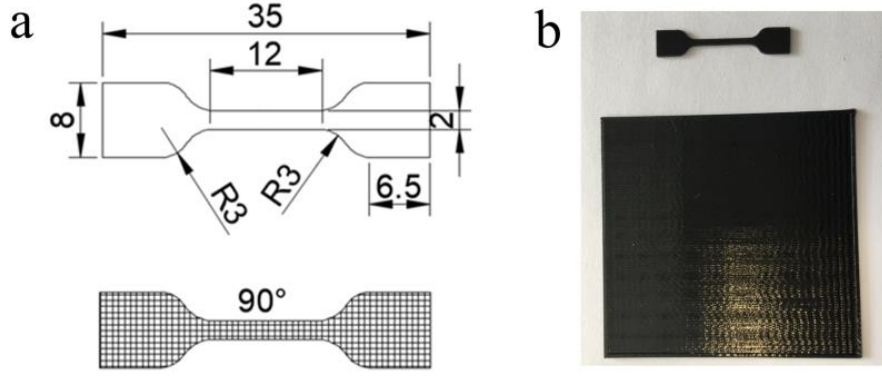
Geometry of tensile sample (ISO 37-T4) (a) and the 3D printed plaque (75×75 mm) (b).
